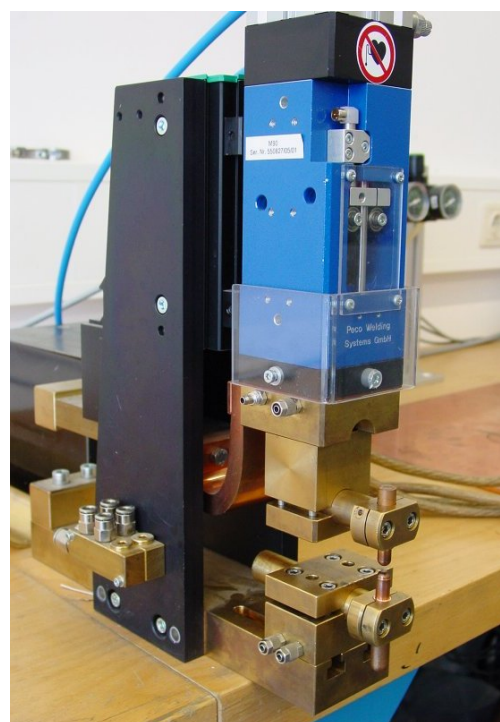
The spot-welding apparatus (Peco Welding Systems GmbH, model: M90/M2L) with installed electrodes.
